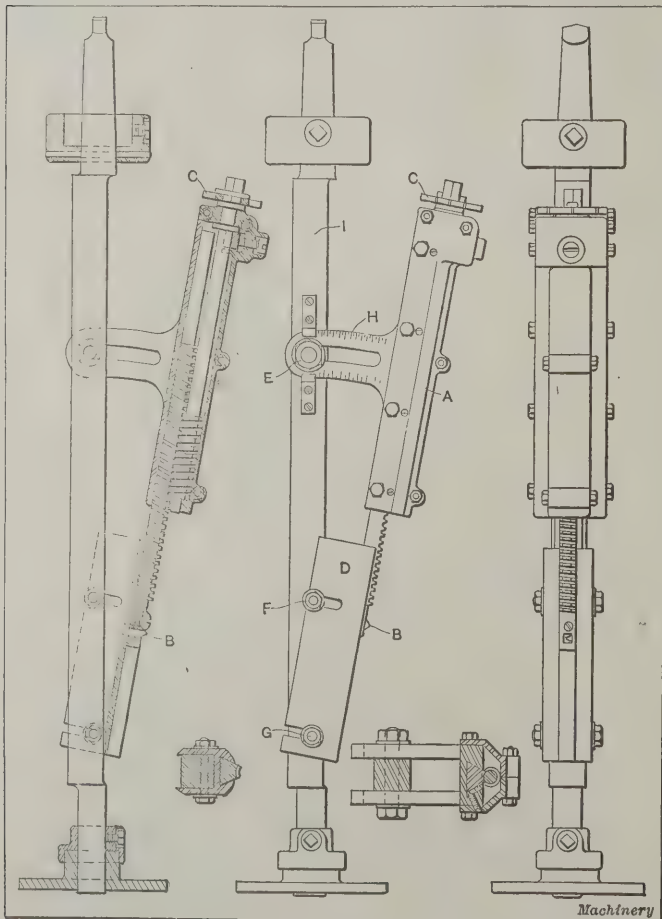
General Design of Portable Boring-bar for Straight and Taper Holes
